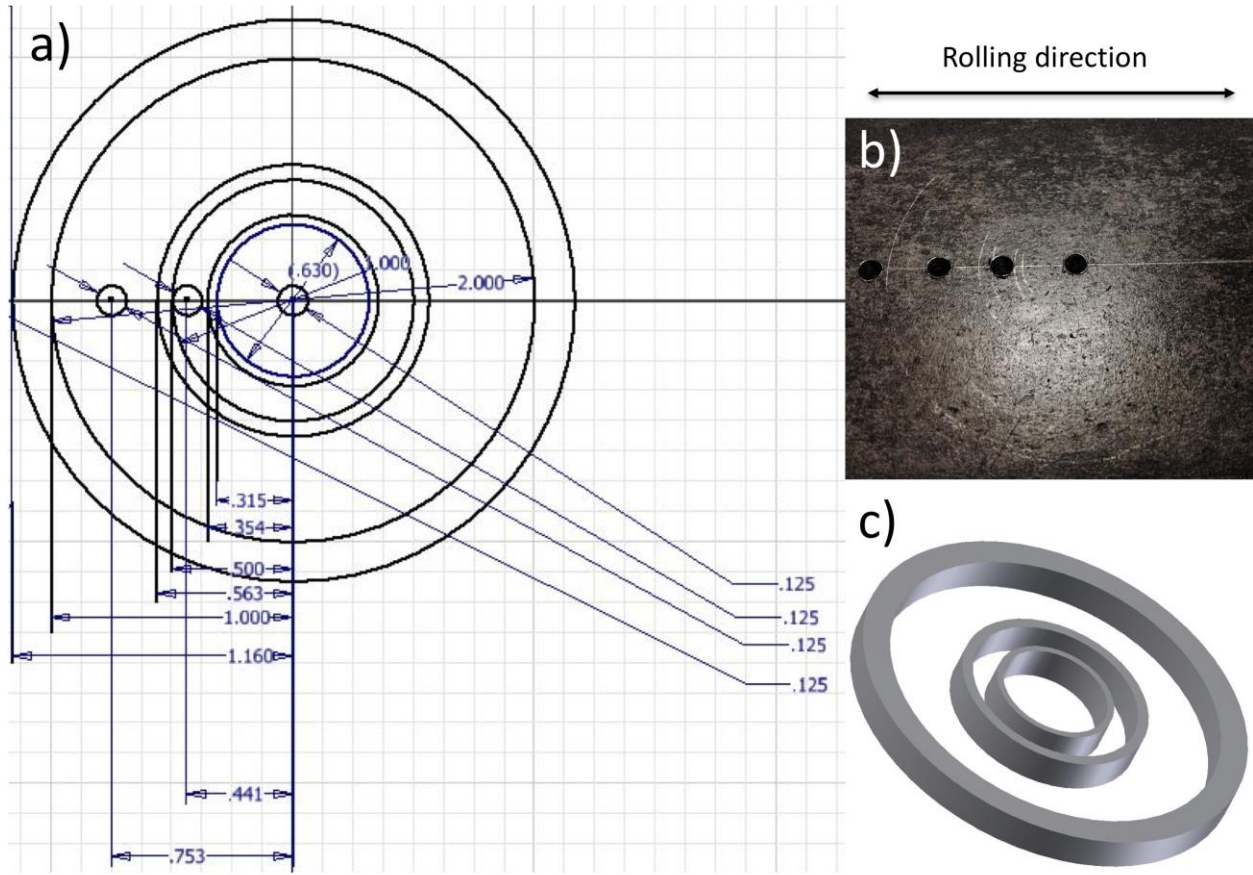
a) Drawing of uniaxial ring expansion specimens (units in inches) such that the height of rings is equal to the thickness of the plate. b) specimens were machined along the rolling direction and holes were appropriately drilled to feed the wire through for electro-discharge machining of the c) concentric set of rings.
